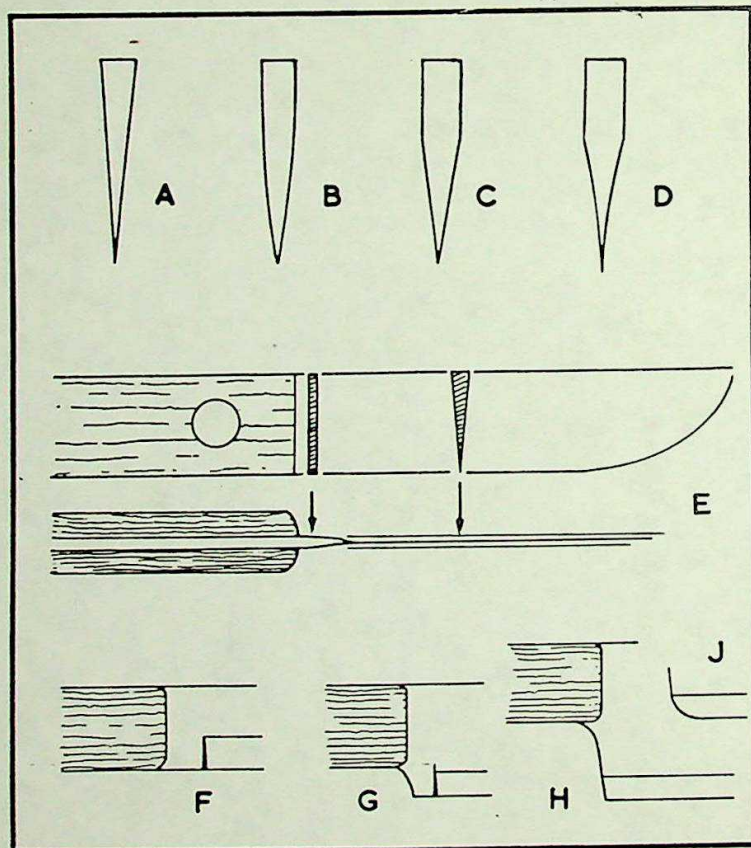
Blade sections depend on thickness and purpose. Cutting edges may stop at a shoulder or be carried through at a dropped edge.
